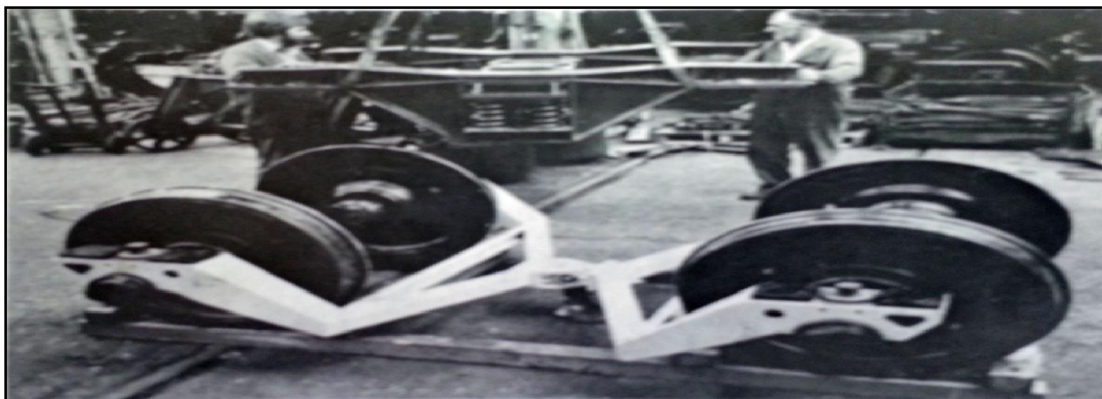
Three piece cross-braced freight bogie showing wheelsets, cross-bracing and axle box shear pads.
